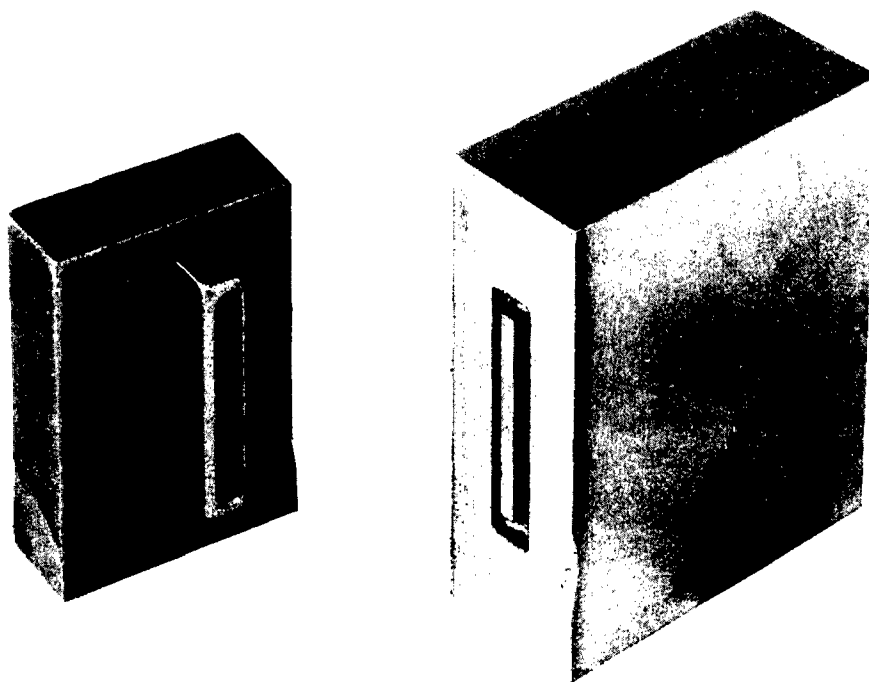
Rectangular Blade Used as EDM Tool to Machine Tip-Cap.
